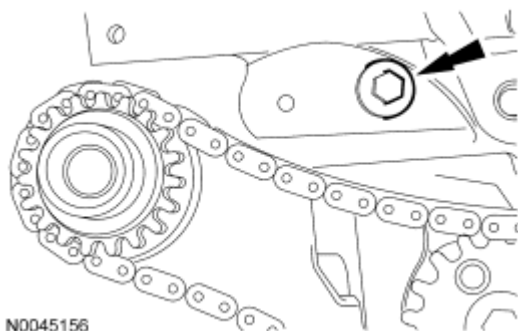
Locating Oil Pump Chain Drive Tensioner Shoulder Bolt
